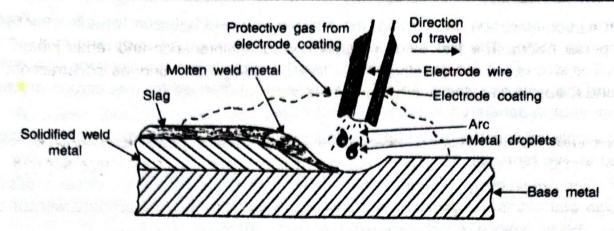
(a). Principle of Flux Shielded Metal Arc Welding.
